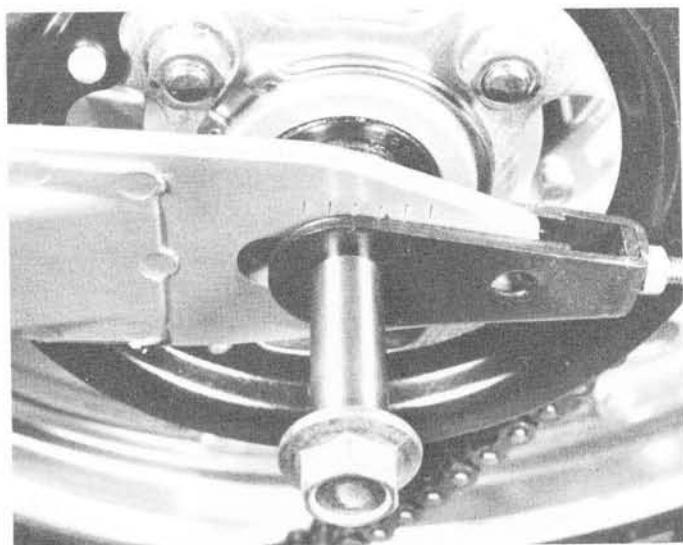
Rear wheel – CB125 T2, TA and TB
